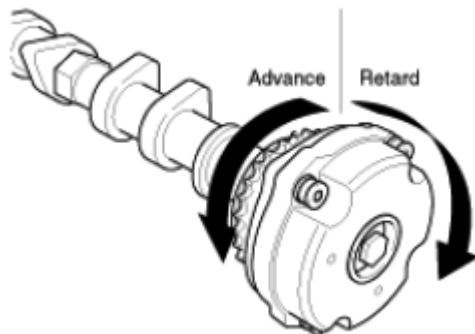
Turning CVVT Assembly To Advance Angle Side
